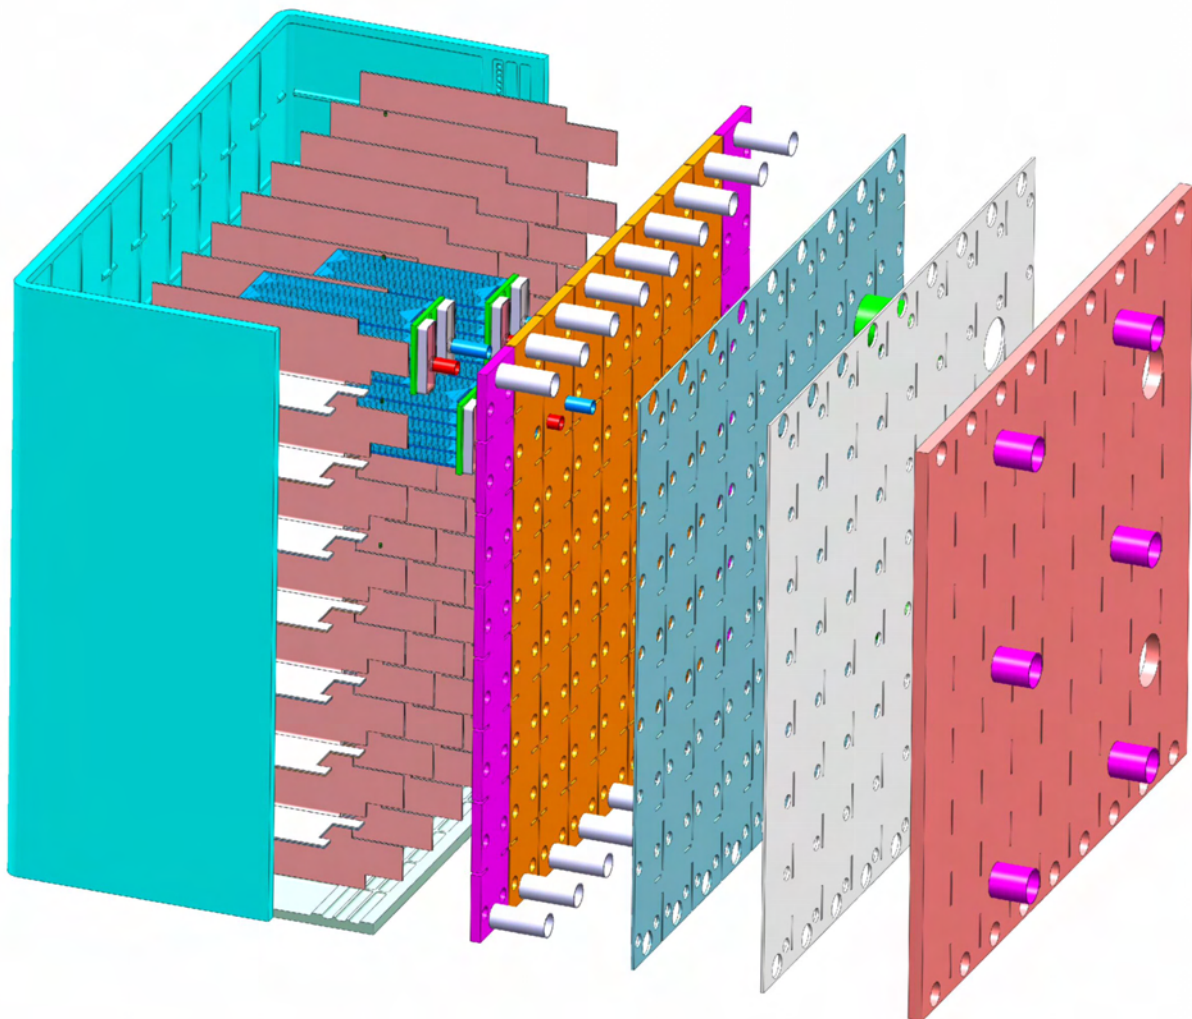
Exploded view of the generic HCLL blanket module (from the rear) with external connexions
